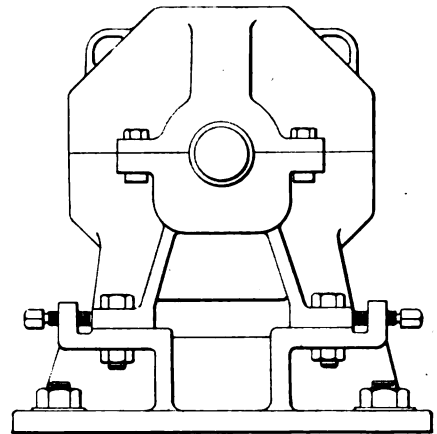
A mounting that permits of horizontal adjustment of motor to facilitate aligning gears.
